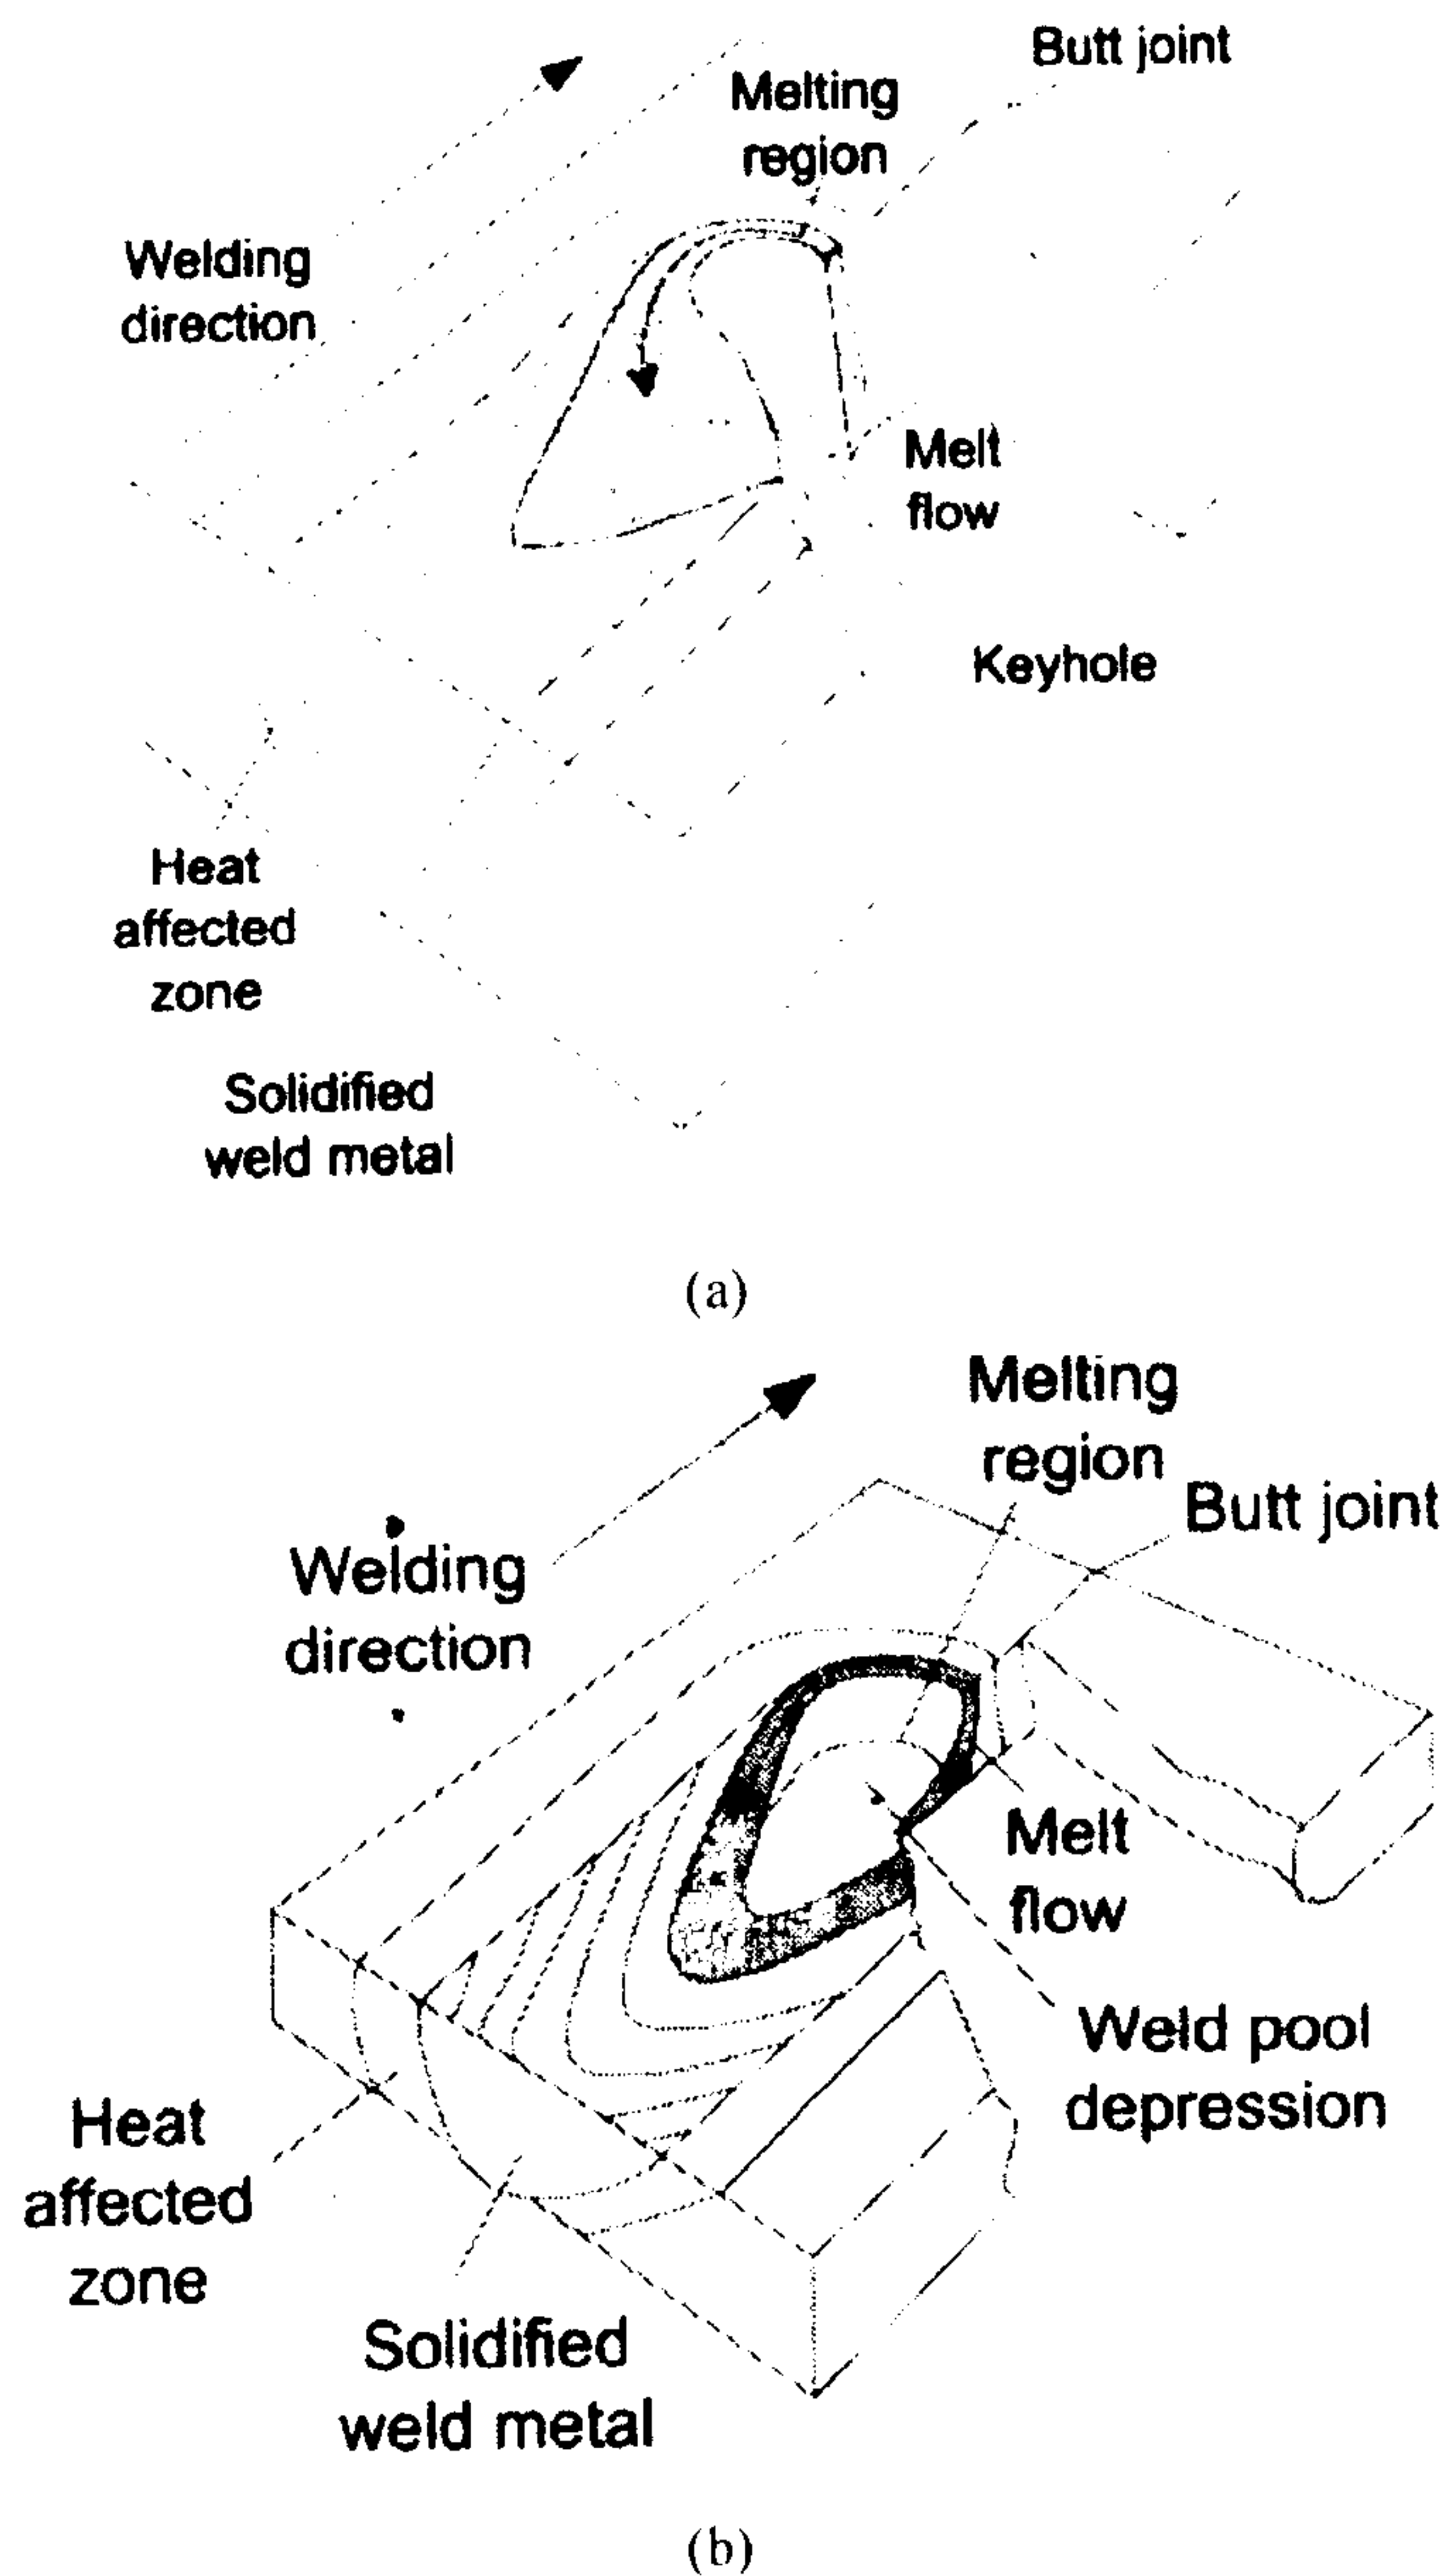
Diagram of Keyhole mode welding and conduction mode welding[13]
